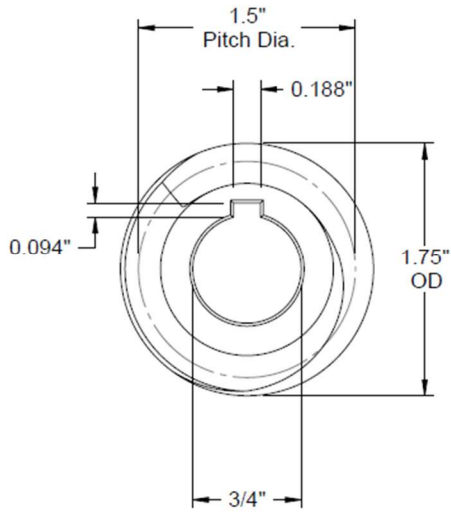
Part 50-0001 Drawing – Worm Drawing (McMaster-Carr)
